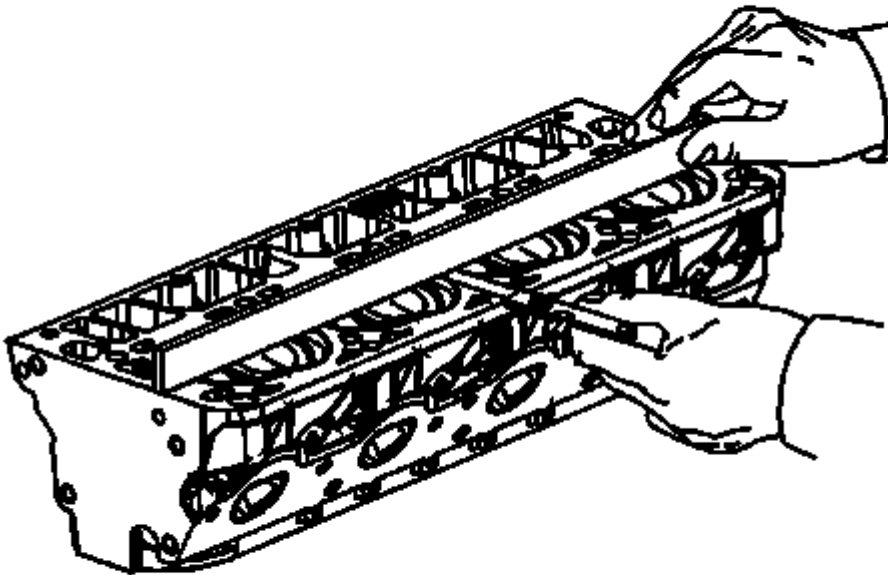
Inspecting Cylinder Head For Warpage
